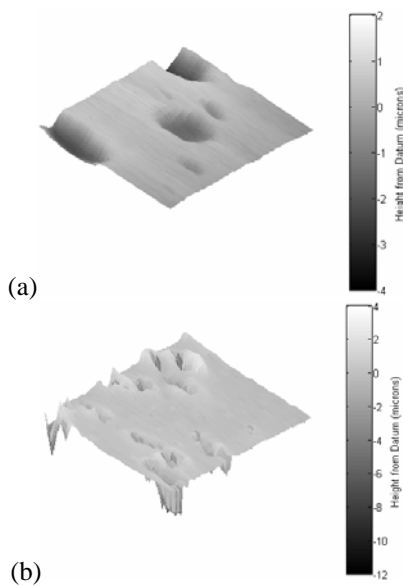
Surface map of a bearing steel roller damaged by (a) low carbon steel (b) silicon carbide, particles in the lubricant. Measurement patch size 0.5mm x 1mm.
